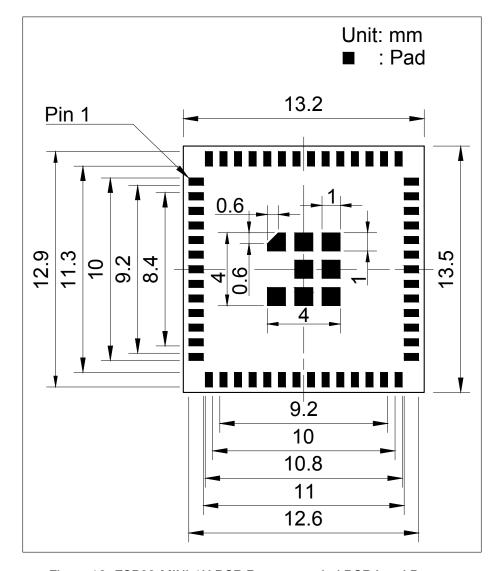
ESP32-MINI-1U PCB Recommended PCB Land Pattern
